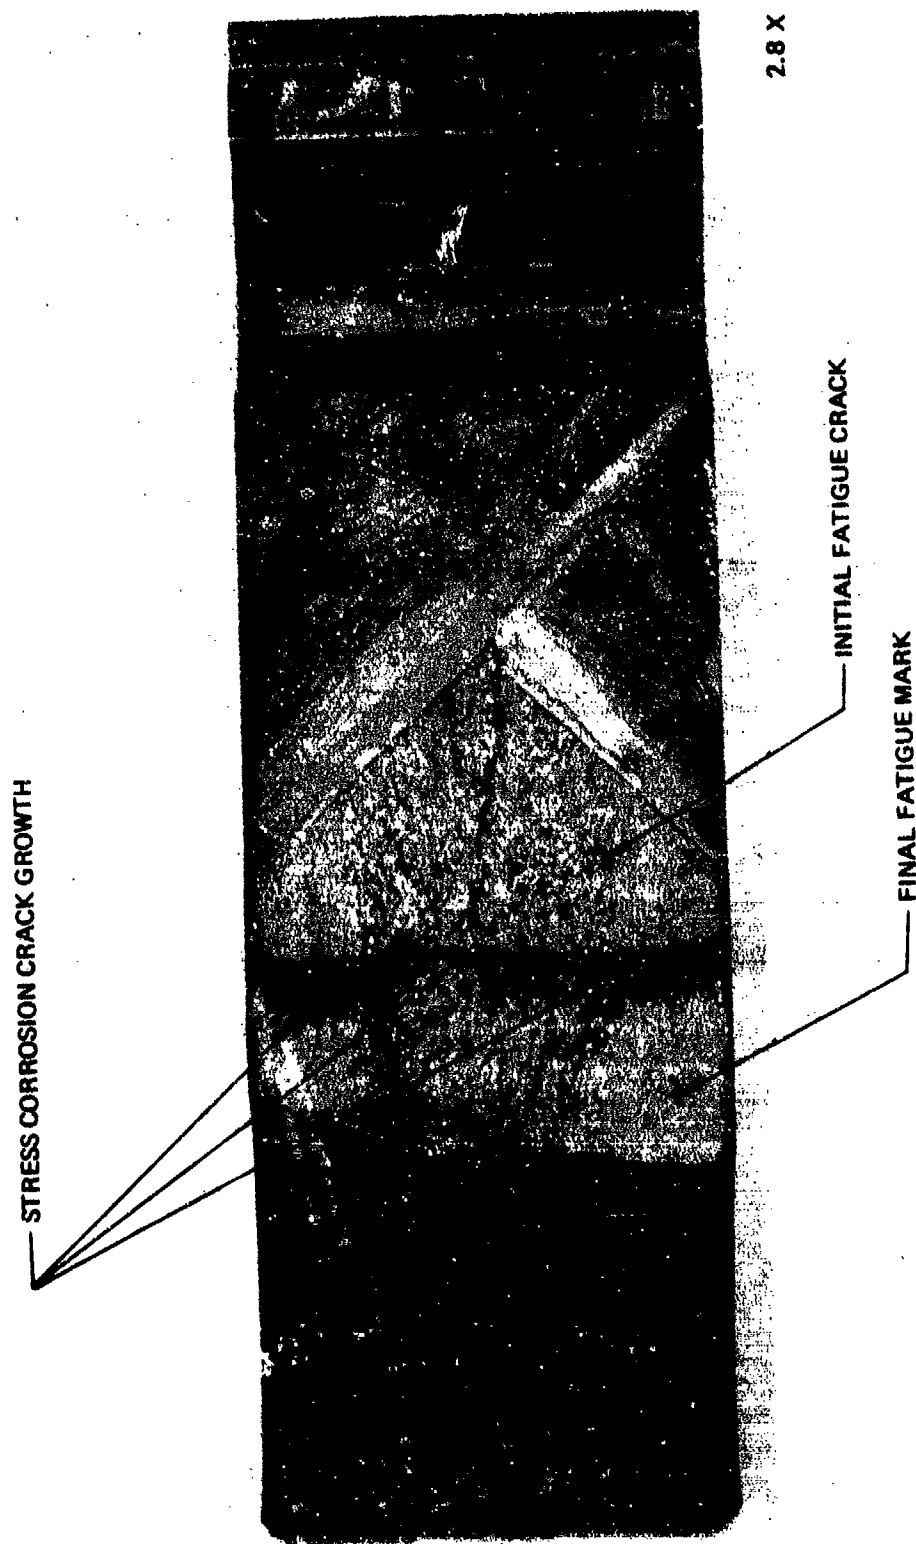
Fracture Surface of Stress Corrosion Specimen 33L I-1 (Plate 33)
